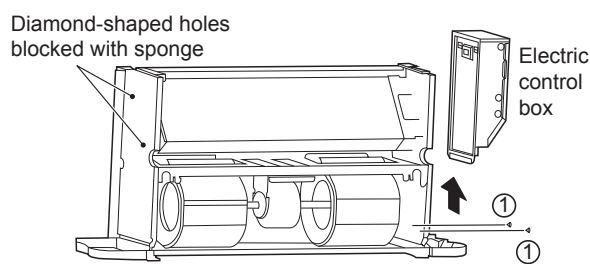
Removing the electric control box and blocking the diamond-shaped holes
